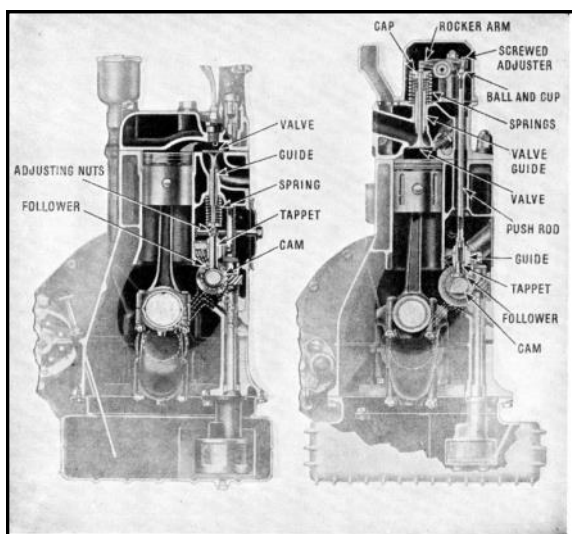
O.H.V. AND SIDE VALVES. On the left is shown a side valve mechanism, and on the right an overhead valve mechanism. The latter type is more efficient as the mixture has not to reverse its flow in order to fill the cylinder which is the case in a side valve engine. Also, adjustment can be more easily and quickly carried out.
